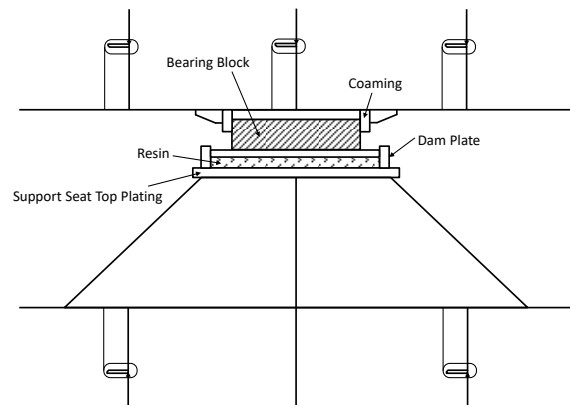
Bearing Block, Coaming/Dam Plate and Support Seat Top Plates of Supporting Structures
